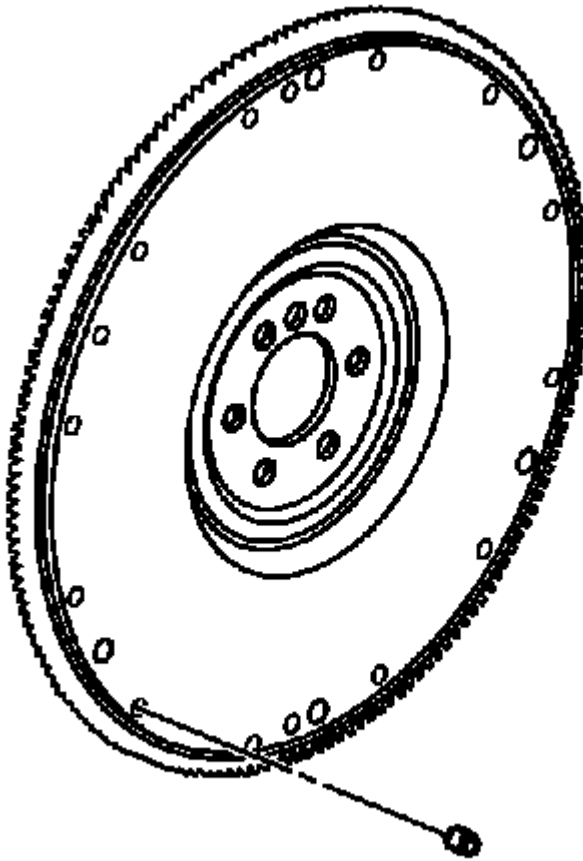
Locating Flywheel Weights (Manual Transmission)
